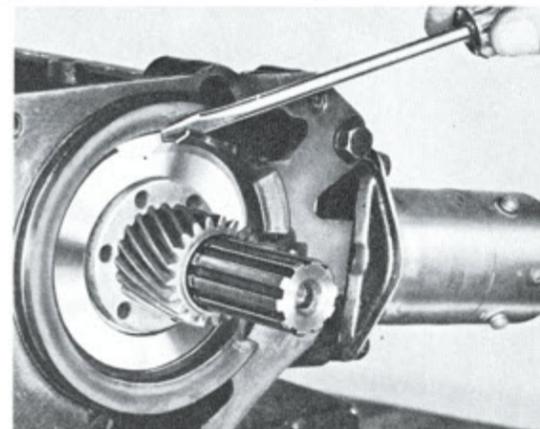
Remove the Large Adapter Plate Snap Ring with a Screwdriver
